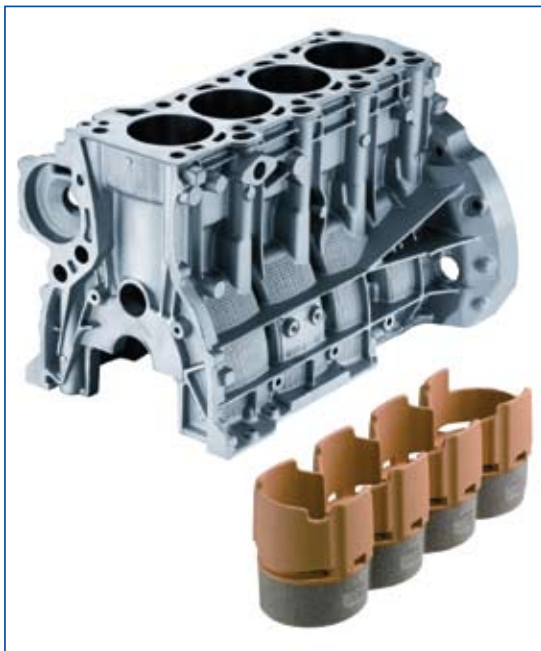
High-pressure diecasting cylinder block (top) and coated water jacket sand core (bottom)
